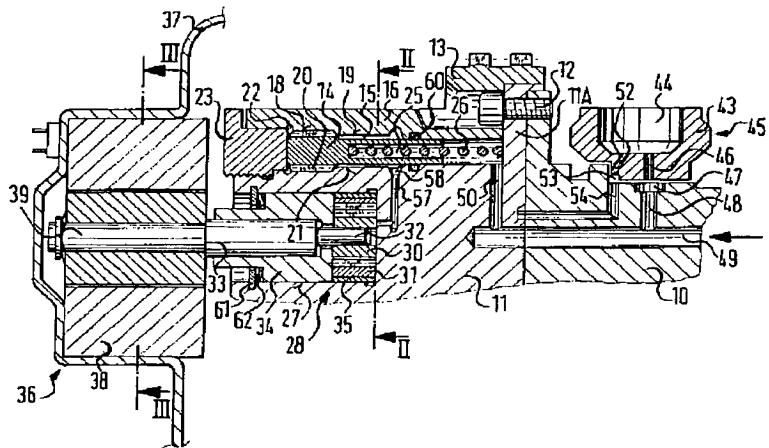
It is the schematic diagram having shown partially another example of the hydraulic machinery-type control unit by this invention.
